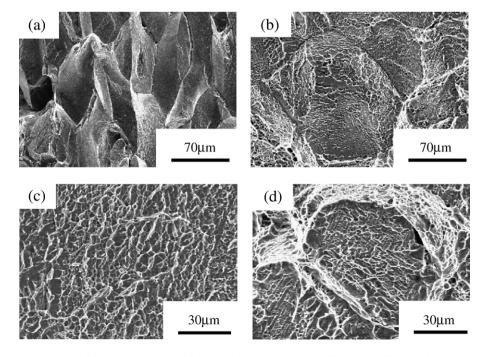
SEM photographs showing the typical fracture appearance of titanium welds: (a) 593 °C-aged SP-700; (b) 760 °C-aged SP-700; (c) 482 °C-aged SP-700; and (d) 482 °C-aged Ti-6Al-4V specimens.
